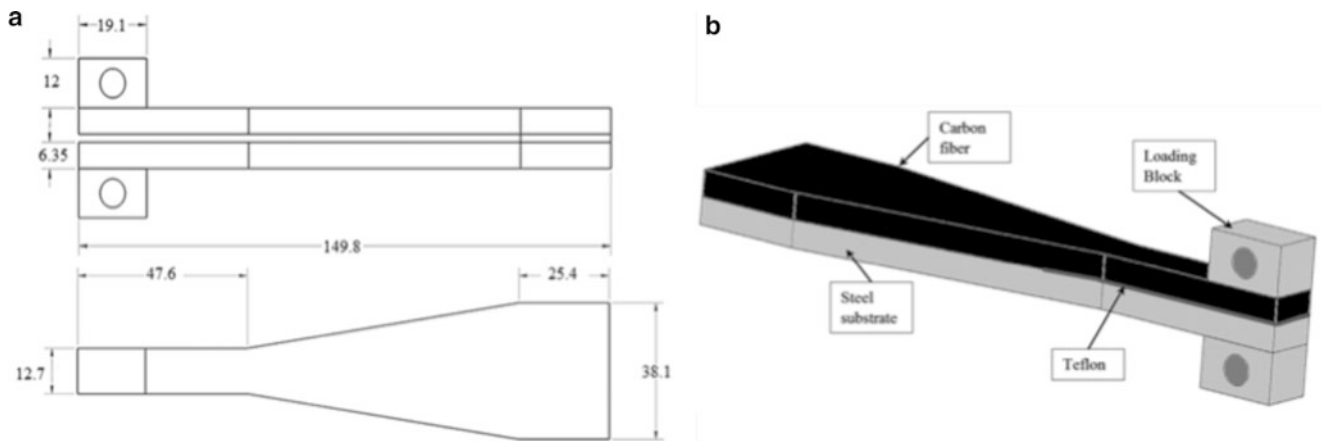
(a) WTDCB schematic dimension in mm. (b) final shape of WTDCB specimen
